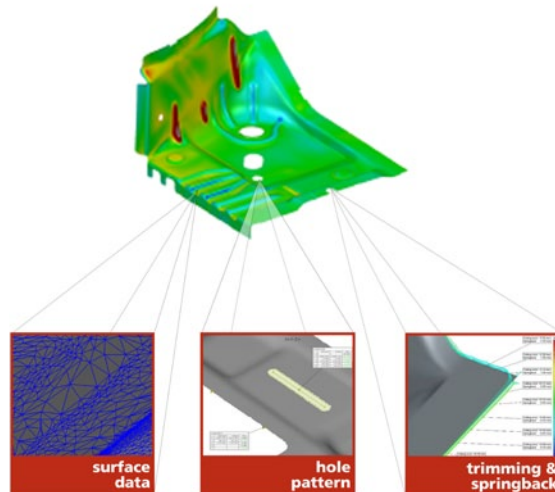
Full surface optical 3D measuring technique, acquisition of the entire component geometry (STL mesh), the hole pattern, (holes, slits, etc.), and the borders (trim and springback)
